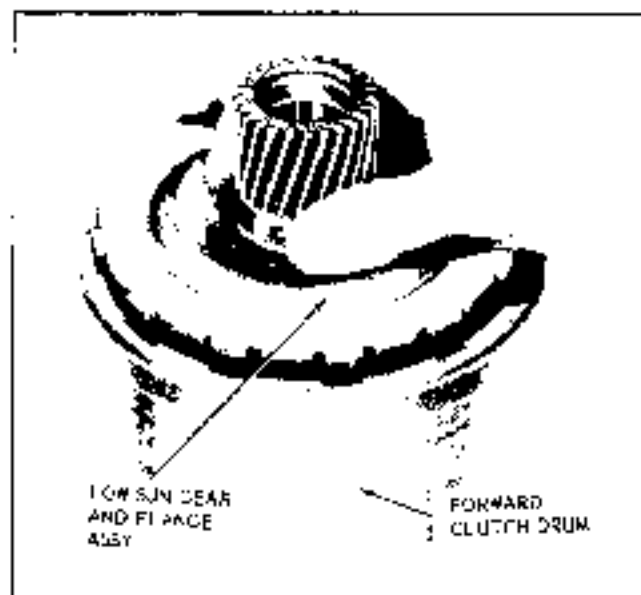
F-44 Removing Low Sun Gear and Flange Assembly
